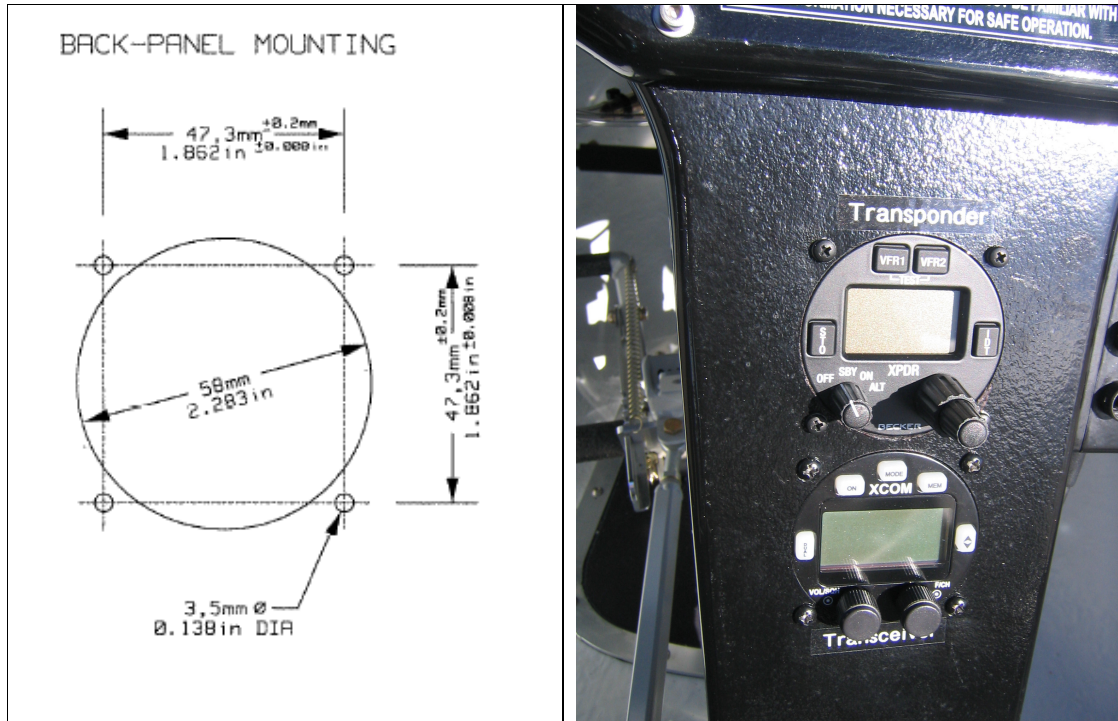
Section 34. Transponder Instrument Face and Mounting Detail
